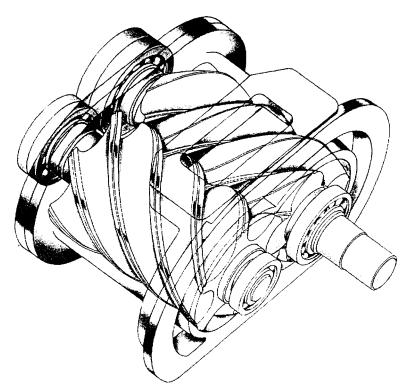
Rotary, helical-screw compressor, typical single-stage design.¹
